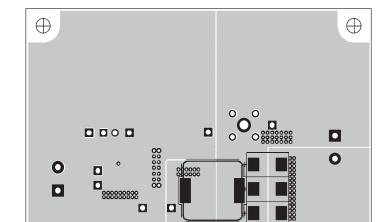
Bottom Side Assembly (Showing Optional Components)
